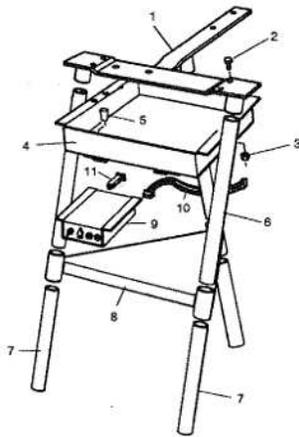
LTAGA STAND ASSEMBLY.
